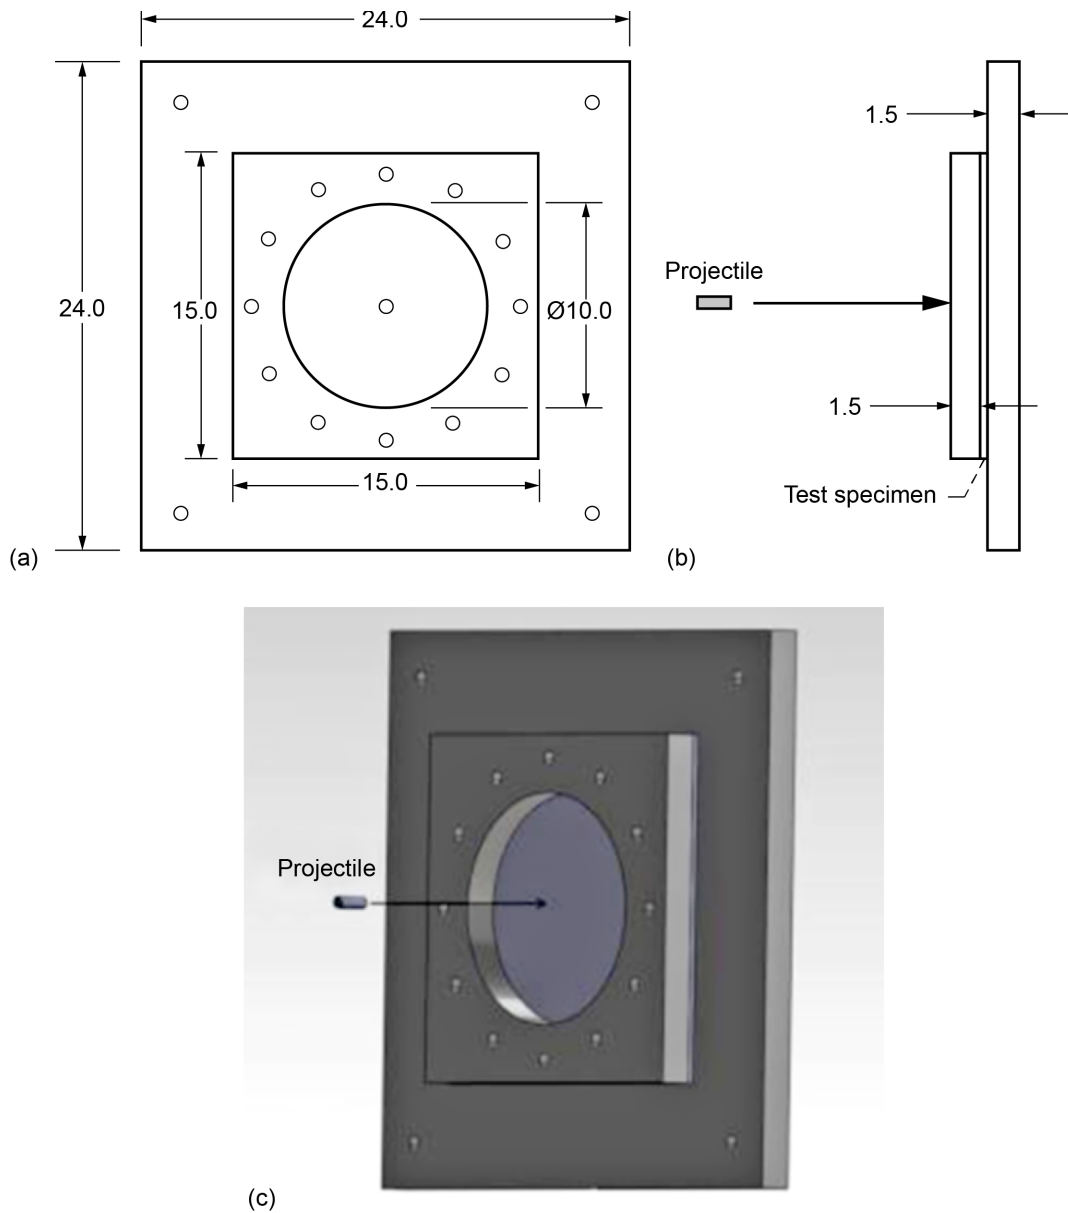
Test fixture assembly; dimensions in inches. (a) Front view. (b) Side view. (c) Clamp fixture assembly.
